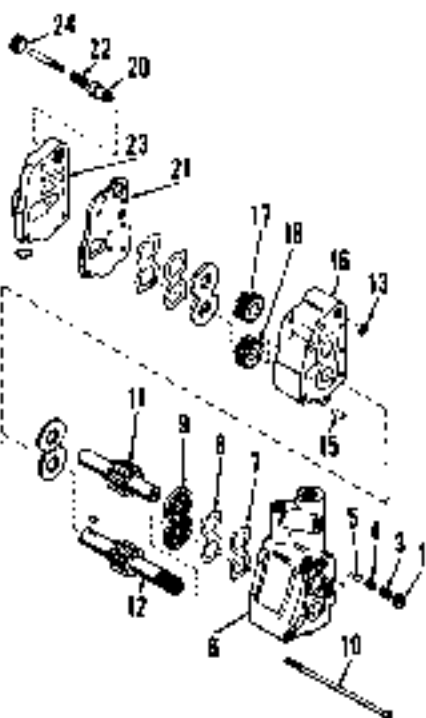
Exploded view of dual section auxiliary pump showing component parts.
